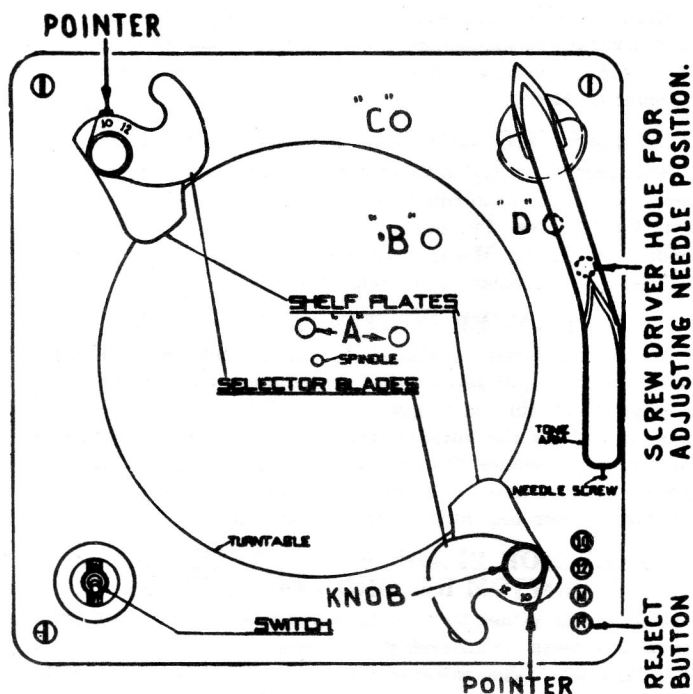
SHOWS SELECTOR BLADES IN POSITION FOR 10-INCH RECORDS.
